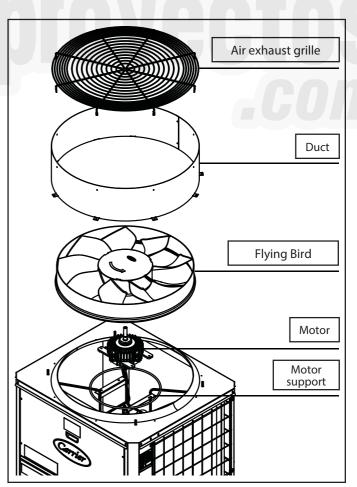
Cutaway view of fan assembly of 30EX/30EV units and Flying Bird Propeller
